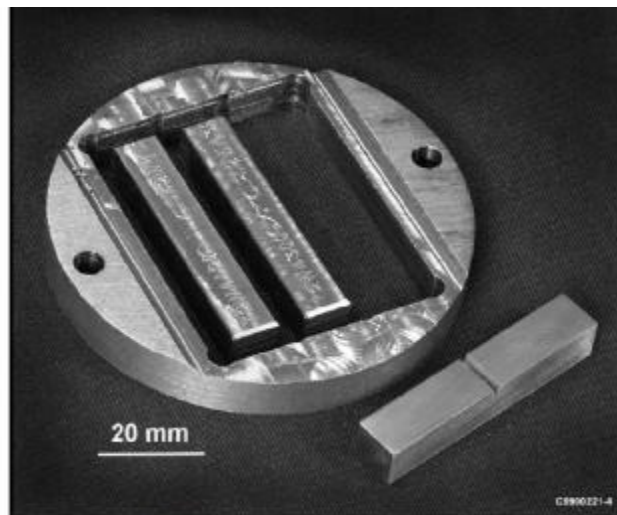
The three Charpy specimen blanks have been milled to final thickness and parted from the disk.
